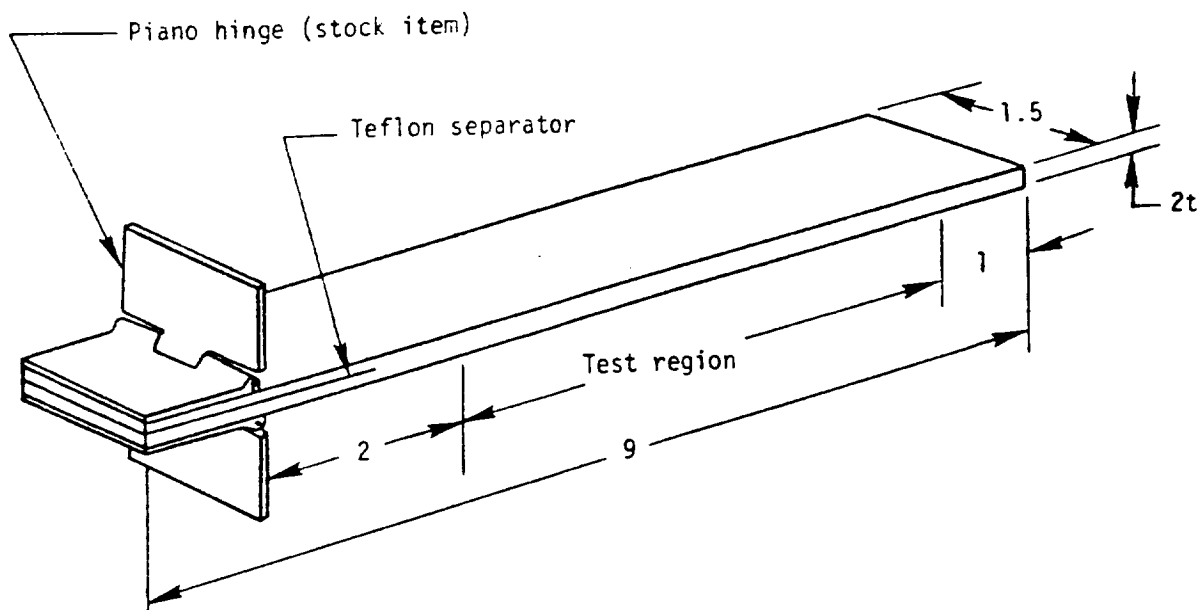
Hinged double cantilever beam (HDCB) specimen.
